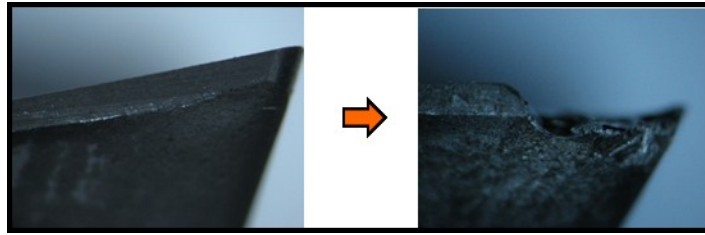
Catastrophic failure of a PVD-TiAlN coated carbide milling insert (flank face). Gross tool failure was again due to high-temperature welding and adhesion of the tool edge to the workpiece material, leading to brittle fracture within the tool body (IC928: Tough grade coated carbide, for machining titanium alloys), (Cost: ~ \$27/insert, from ISCAR).
